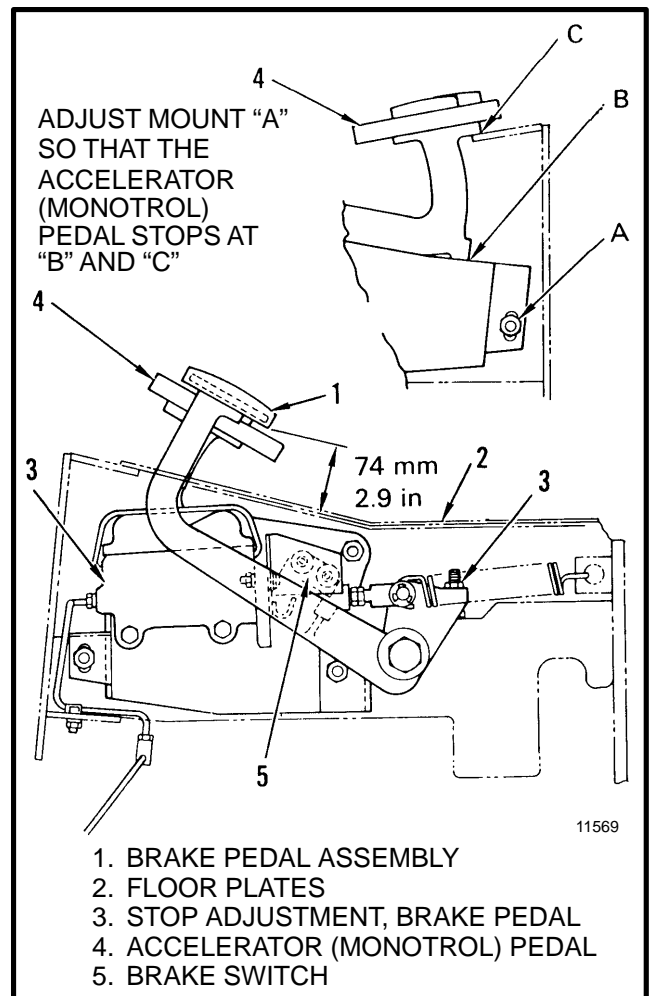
BRAKE AND ACCELERATOR PEDAL ADJUSTMENT (E/J25-60XL)
